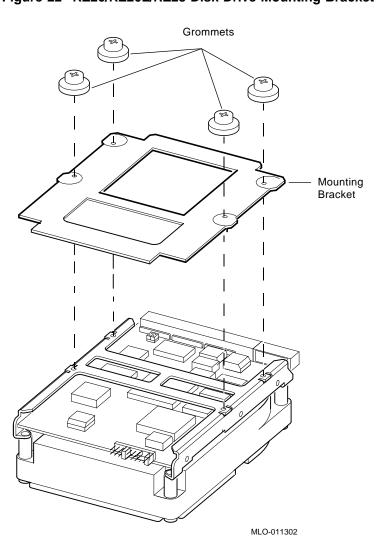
RZ26/RZ26L/RZ28 Disk Drive Mounting Bracket
